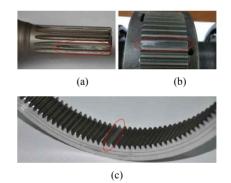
Seeded wear failure: (a) Sun gear; (b) planet gear; (c) ring gear.
